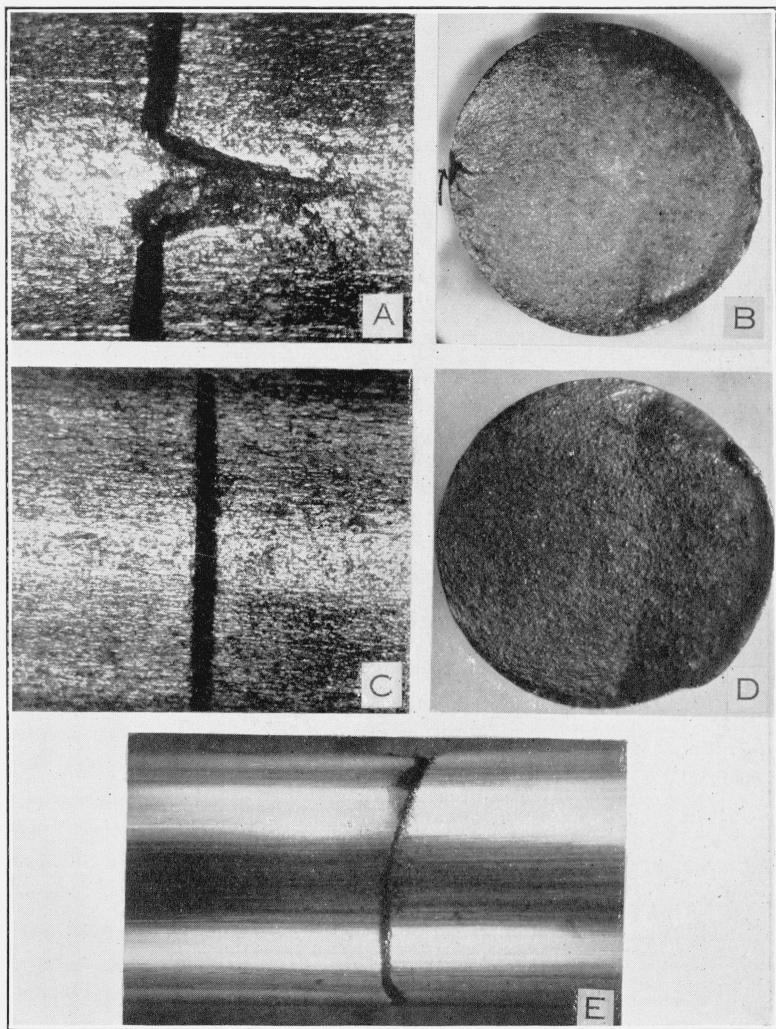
Conditions of the surfaces of specimens of Swedish valve-spring wire WC, table 1.
